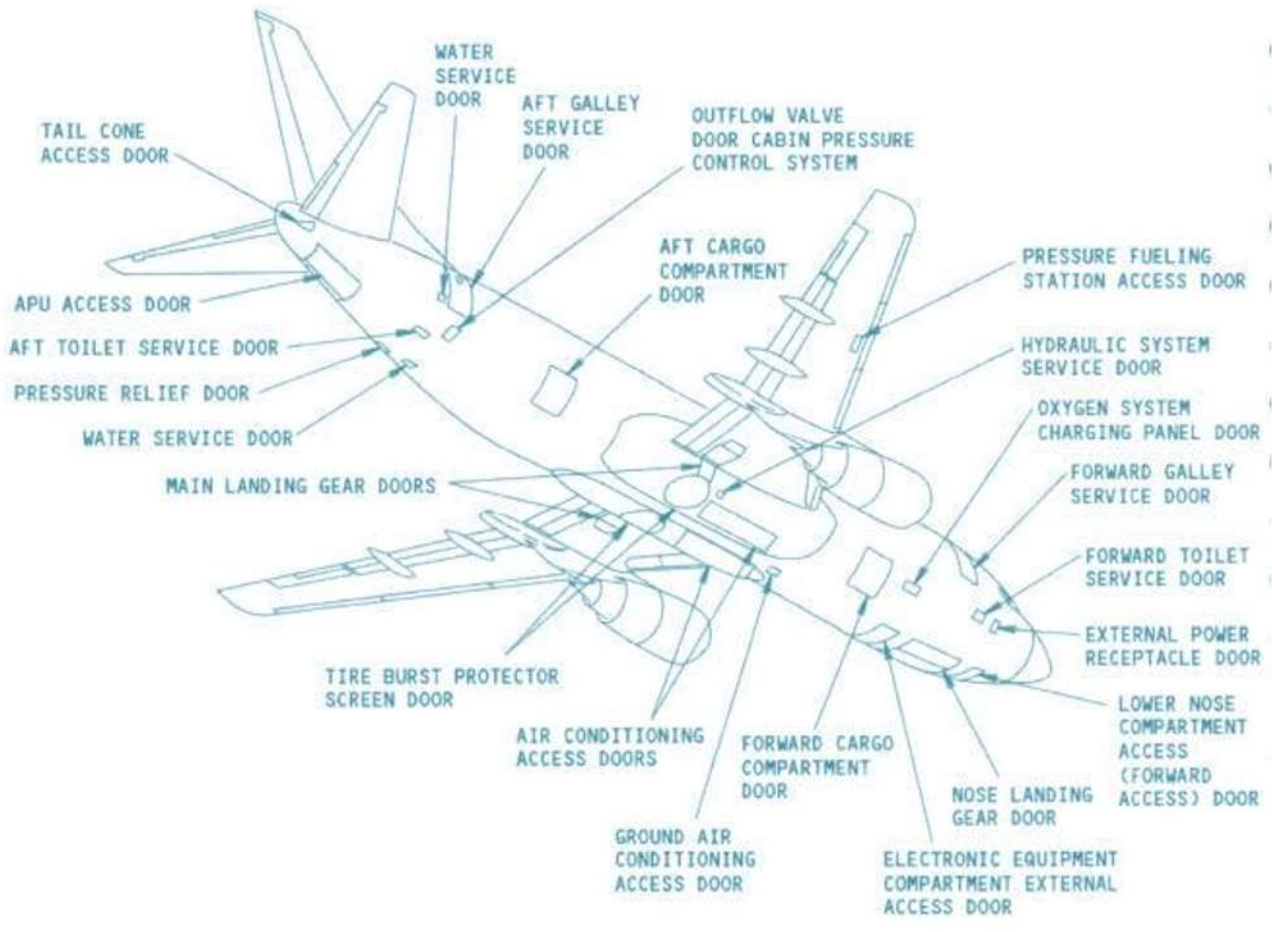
Door locations on the Boeing 737 (from underside)
